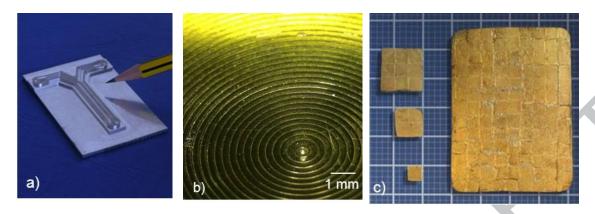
Tools for ultrasonic hot embossing milled into aluminum (a), electroplated onto a polymer lens (b) [43], and electroplated after multiple embossing of the tool at the lower left into a PMMA plate (c) [43].
